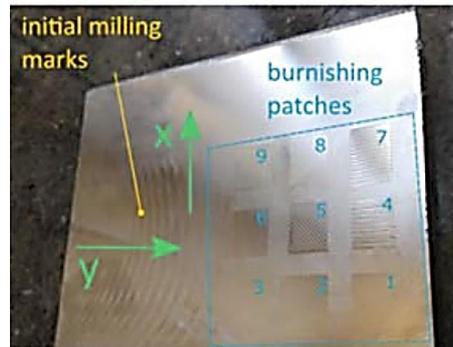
Burnished workpiece by R. Jerez-Mesa et al. [15]
